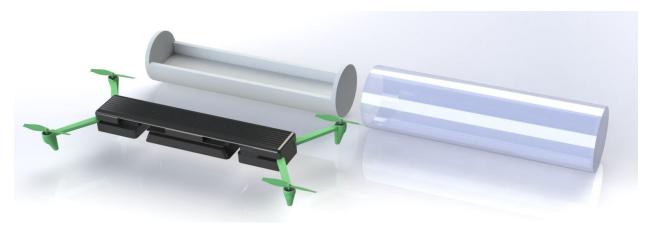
Expanded Quadcopter, Sled, and Internal Payload Tube
